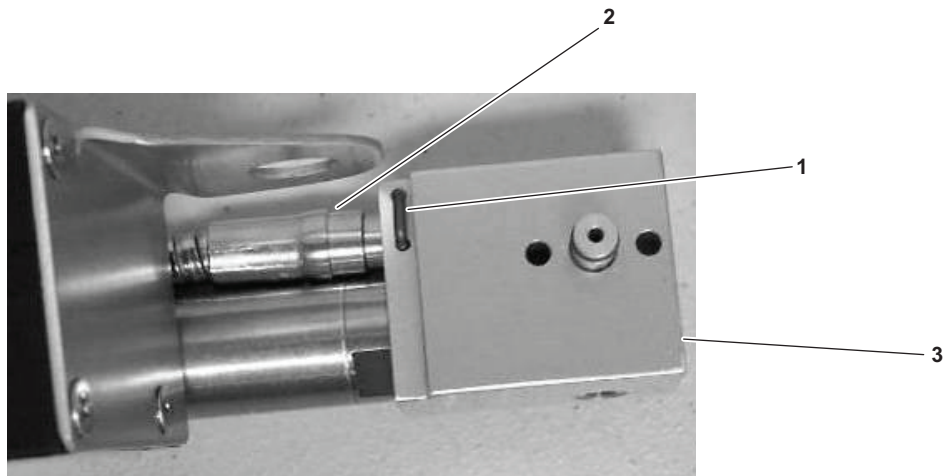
Remove Remote Pressure Indicator High-Pressure Hose
